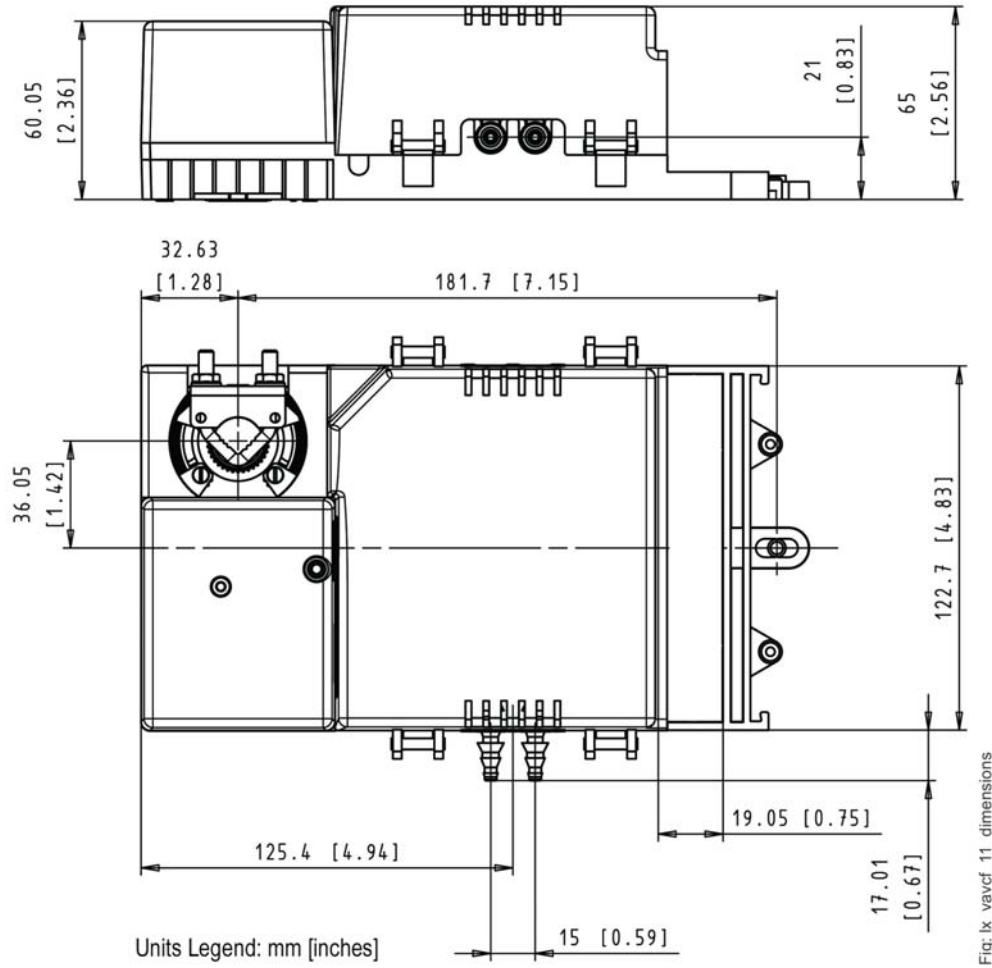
LX-VAVCF-11 Dimensions, mm (in.)
